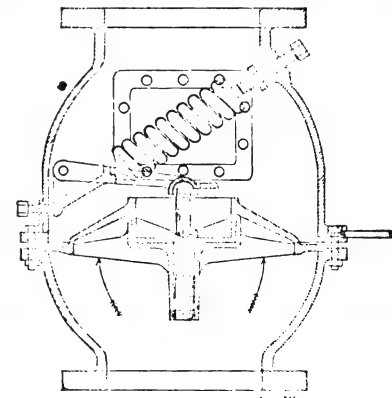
FOSTER BACK PRESSURE VALVE.
